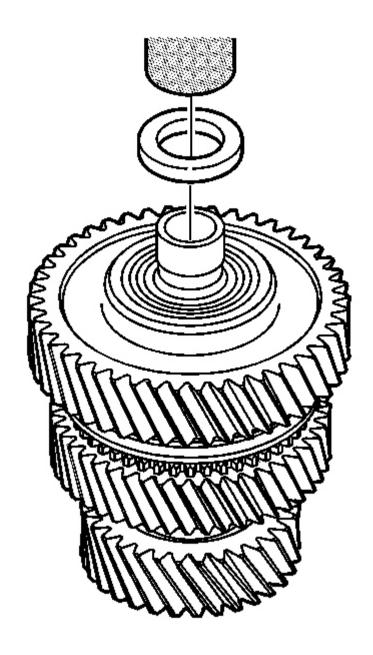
Thrust Washer & J 24433 Courtesy of GENERAL MOTORS CORP.
